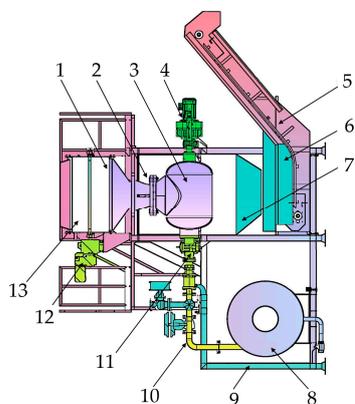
Structure diagram of steam sheller: (1) separator; (2) discharge port; (3) steam reaction tank; (4) motor; (5) mesh belt conveyor; (6) collection pond; (7) discharge port; (8) steam tank; (9) rack; (10) pipeline; (11) rotary joint; (12) gear motor; (13) driveshaft.
